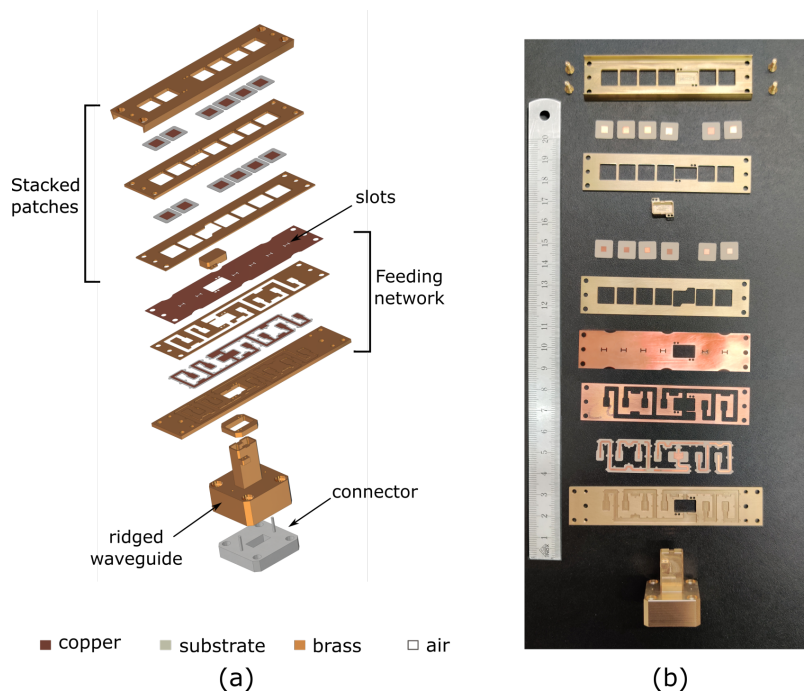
Proposed subarray: a) exploded view of the subarray and b) fabricated subarray. Technical drawings detailing the subarray parts are included in the Appendix.
